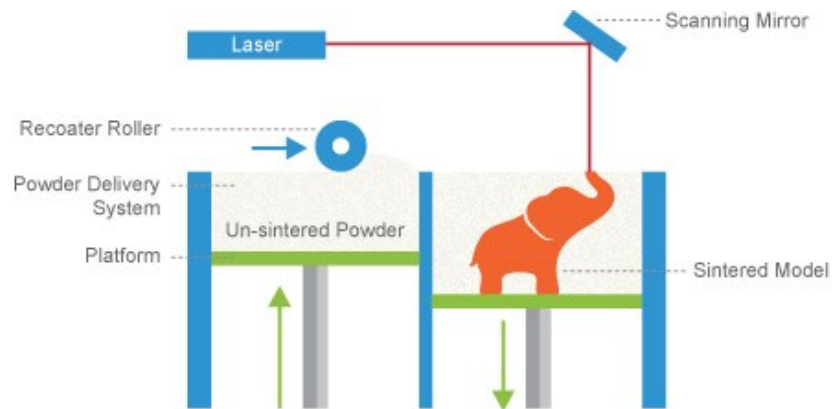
Selective laser sintering (SLS) (printsace3d.com)
